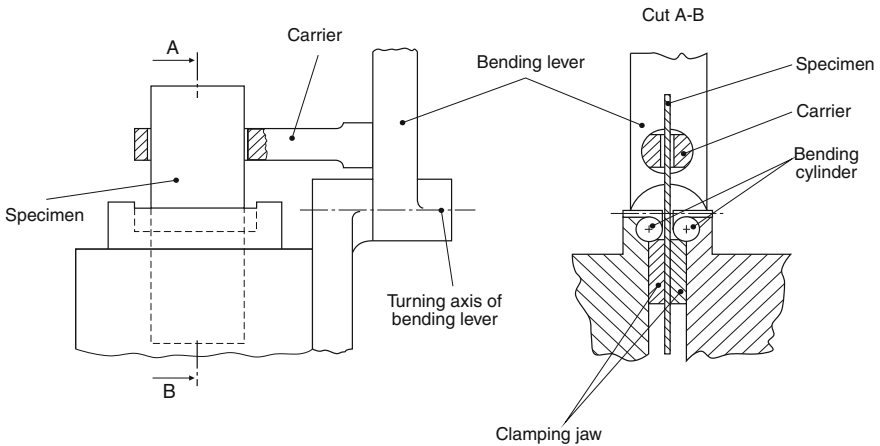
To-and-fro bending apparatus for sheet metals, belts and strips (acc. to DIN EN ISO 7799 [ISO00])
